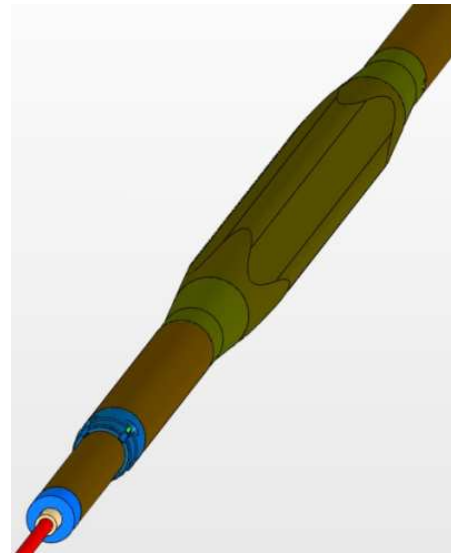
electrical deformed fuel rod prototype (SAFRAN)
